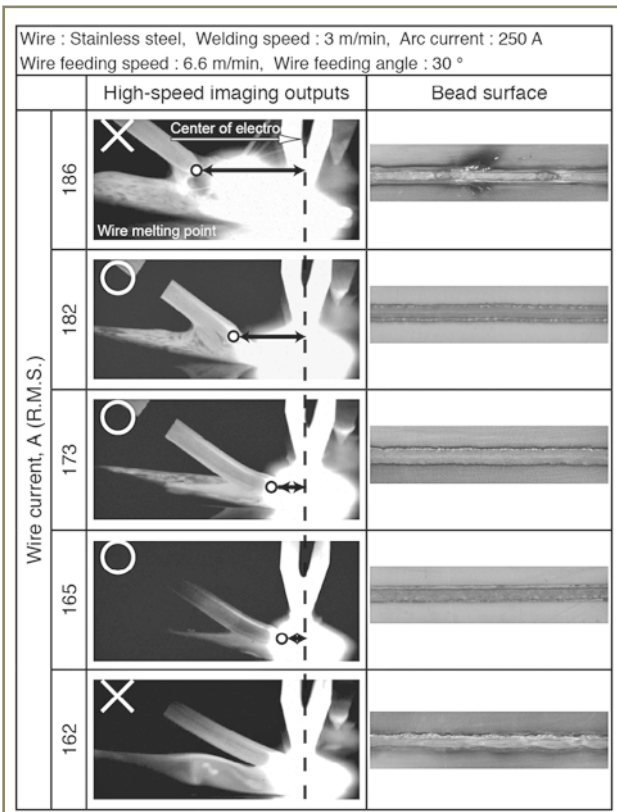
High-speed imaging outputs and bead surfaces (stainless steel)
